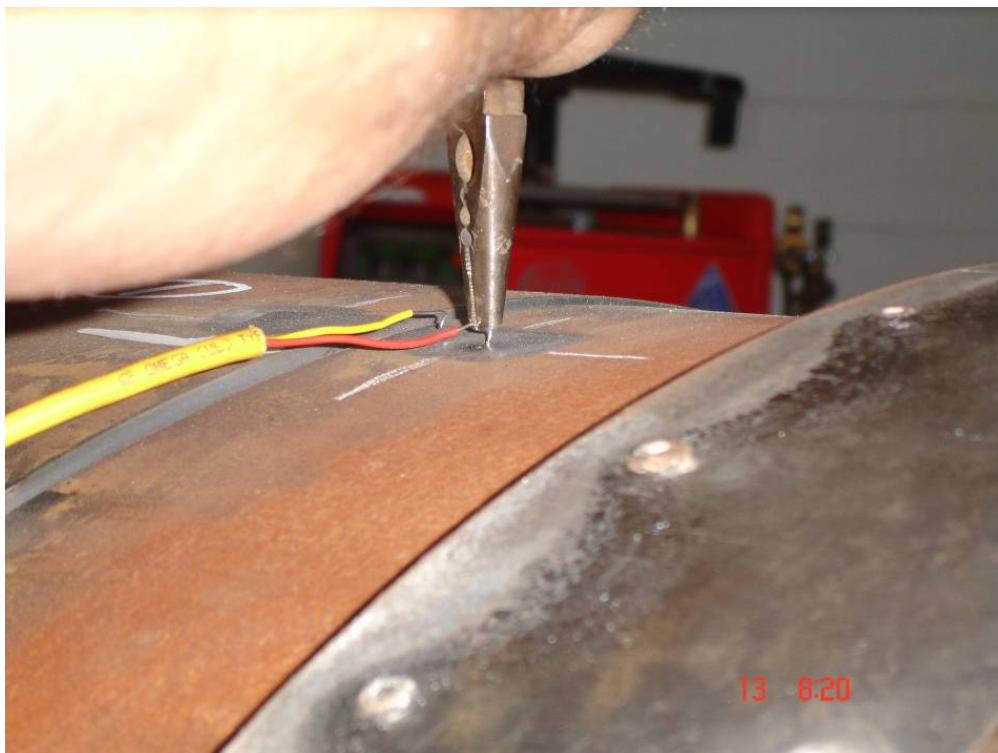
Attachment of Thermocouples Prior to Welding
